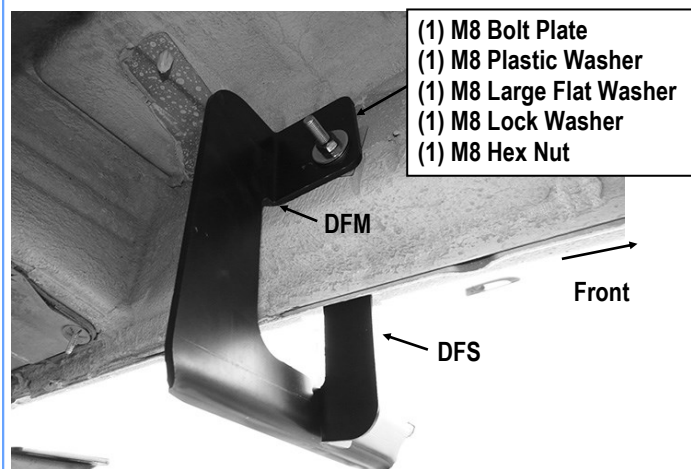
Driver Front Mounting Bracket (DFM) and the Driver Front Support Bracket (DFS) Assembly
